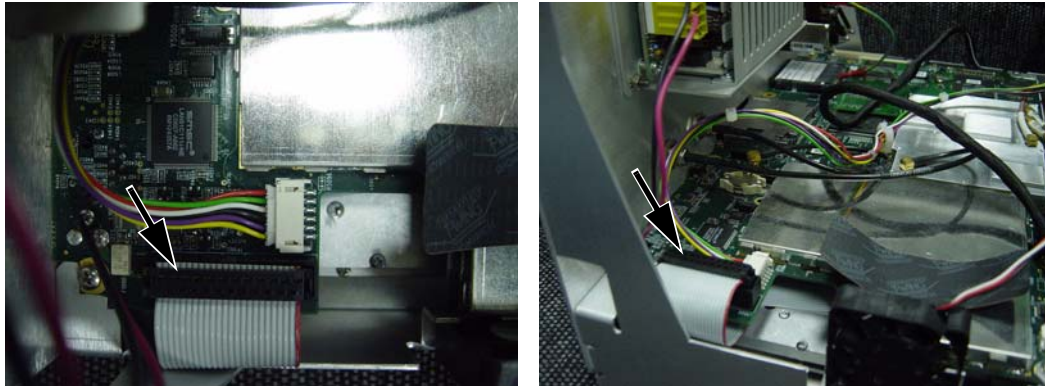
Cable Connector from Main PCB to SPA PCB
